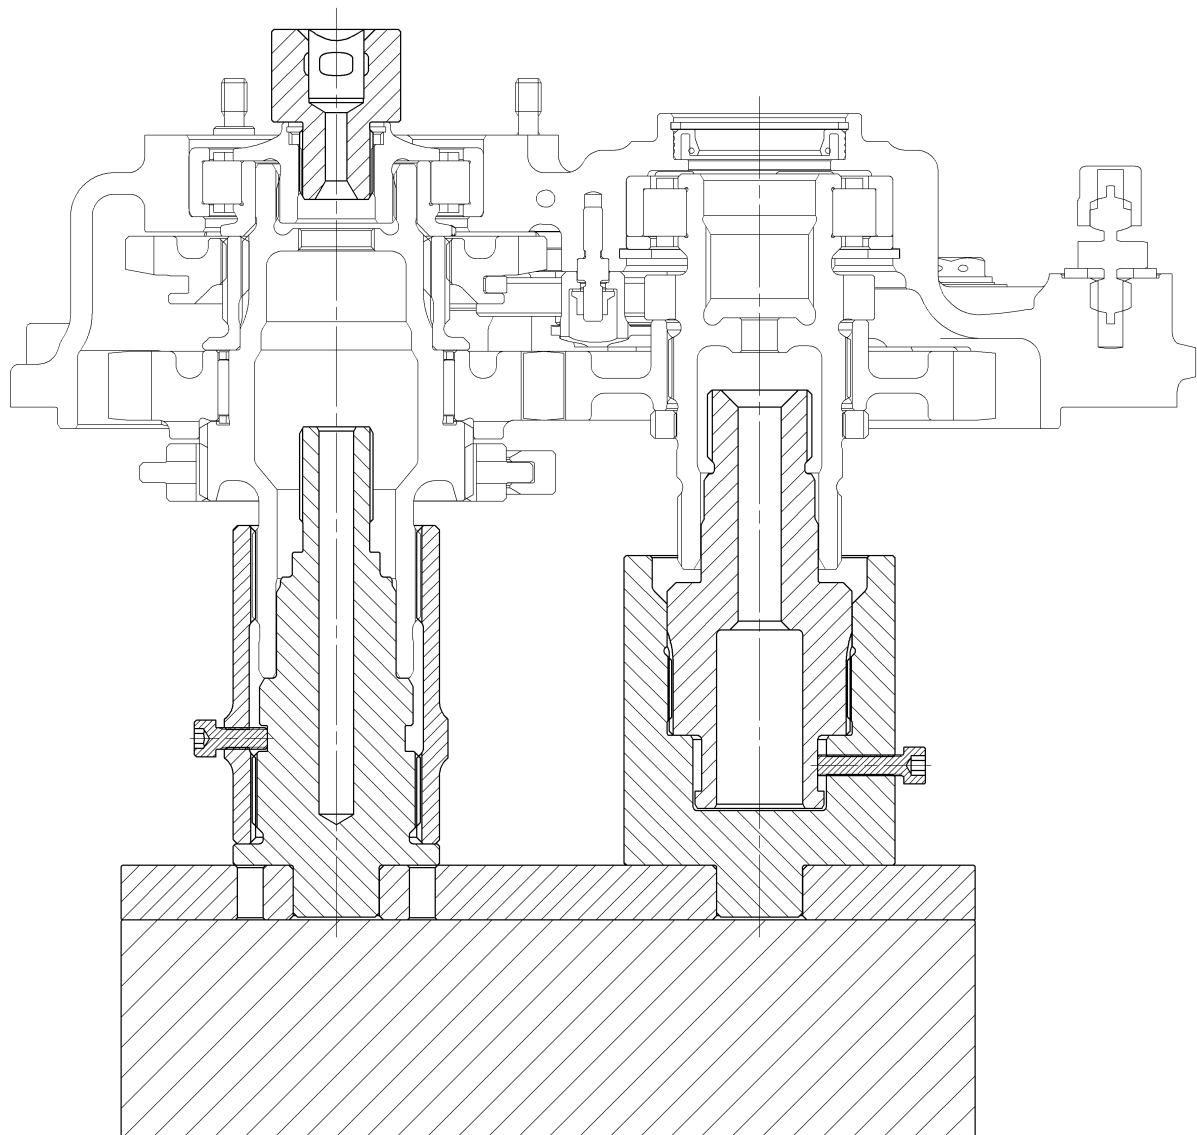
Cluster Holding Tool for Tightening/Loosening LH Mainshaft Nut
